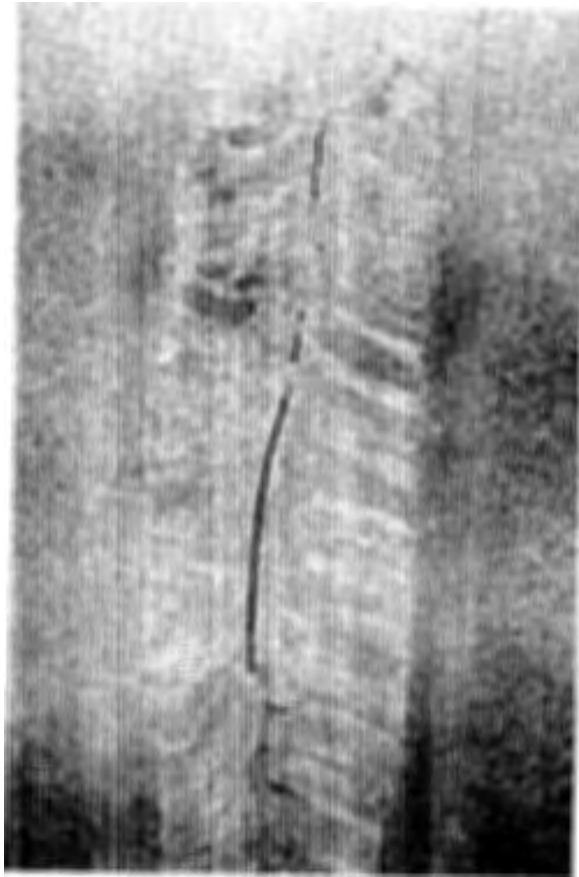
Macrograph of hot cracks in ES welds. (Micrograph.)
